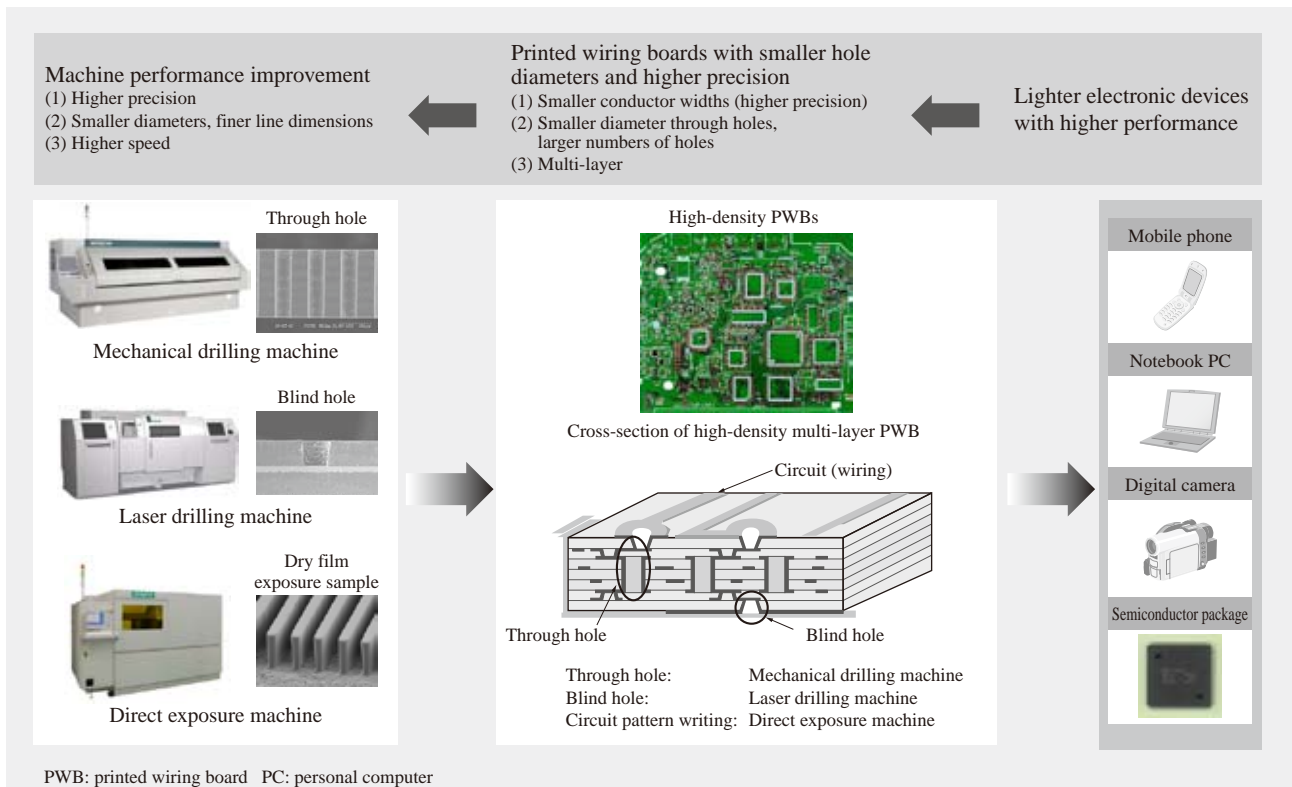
Role of Drilling Machines and Exposure Machines in Printed Wiring Board Production. Mechanical and laser drilling machines are used to machine interlayer connection holes on multi-layer printed wiring boards and direct exposure machines are used for circuit pattern formation.
